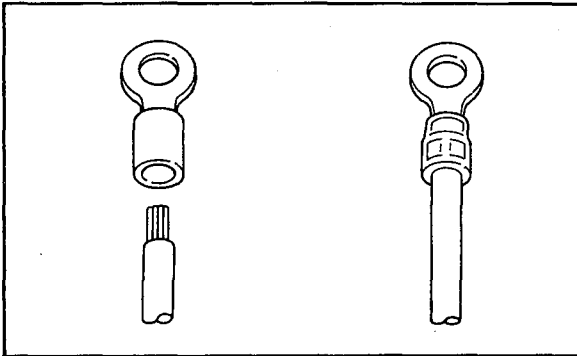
Solderless Crimp-On Terminal Lugs.
